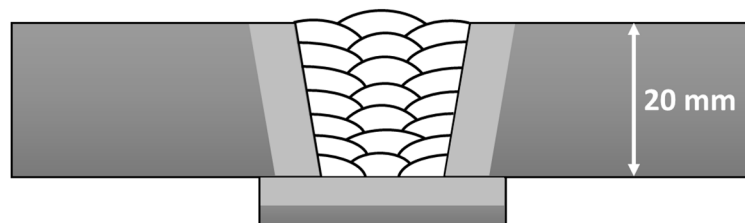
Sketch of all-weld metal sample according to DIN EN ISO 15792-1 with seven layers and three weld beads per layer. A lighter shading indicates the buffered zone.
